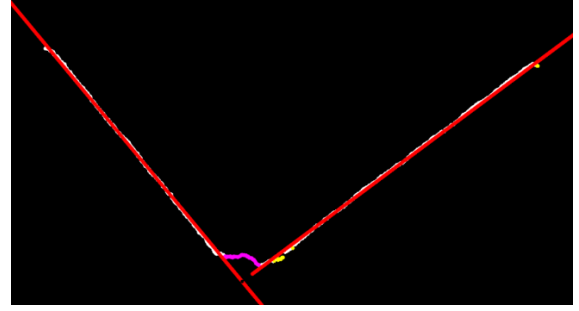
Detected straight lines and extracted weld bead part.
